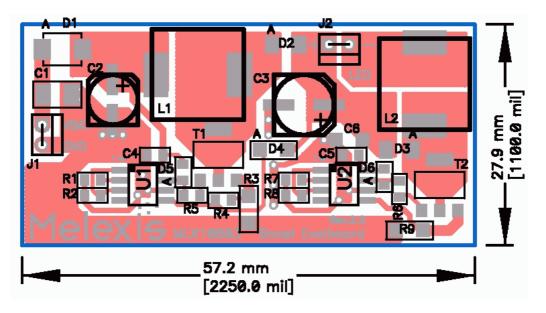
MLX10803 Boost/Buck Evaluation board, dimensions and layout (top view)
